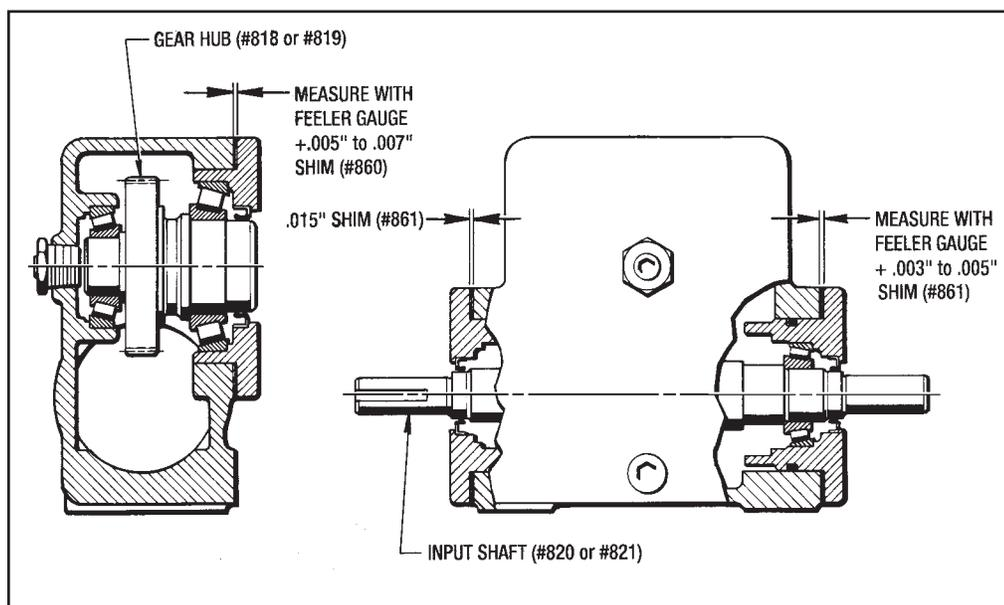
Determining Shim Thickness of Bearing Retainers
